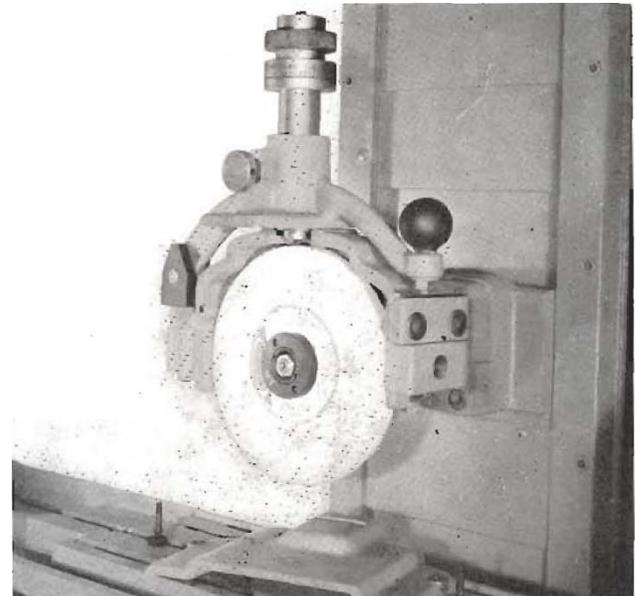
Over-the-Wheel Truing Attachment shown with wheel guard cover removed.
